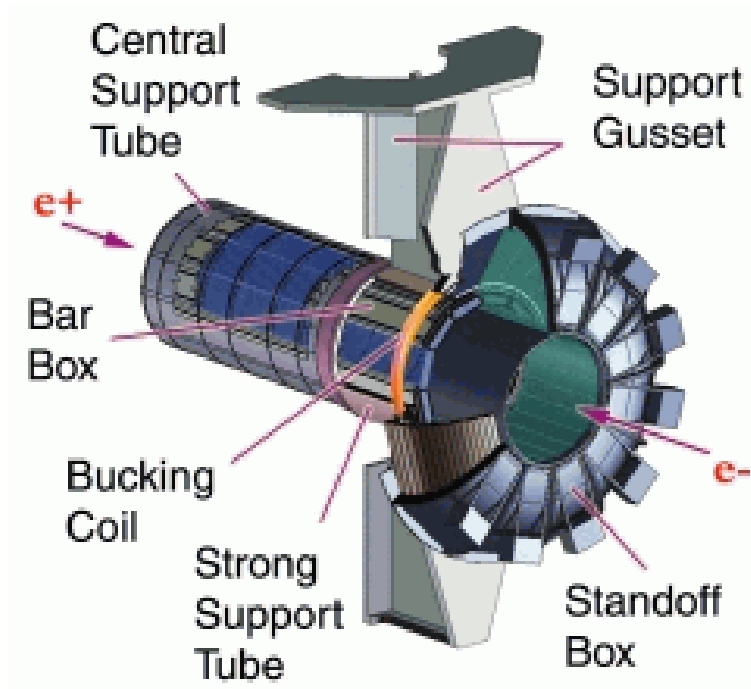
Exploded view of the DIRC mechanical support structure.
